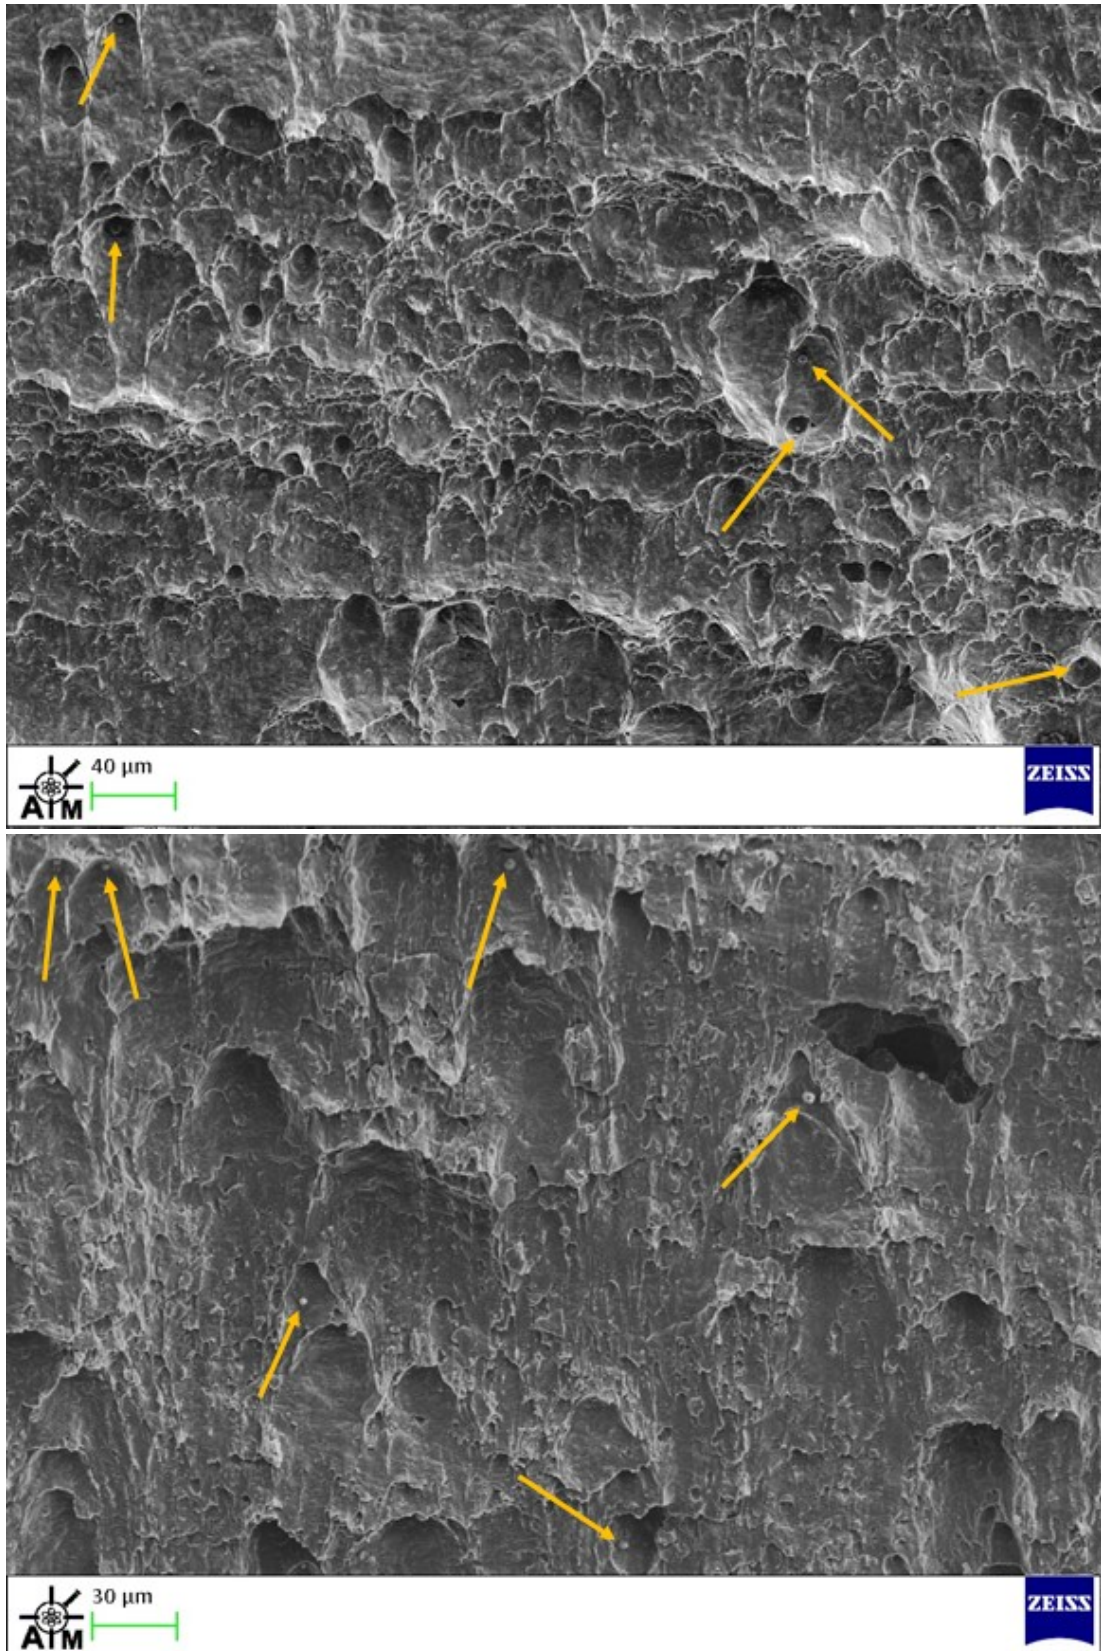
Inclusions consisting of aluminium and calcium on ductile fracture surface of AW specimen tested at ambient temperature (top) and BM specimen tested at -60 °C (bottom).
